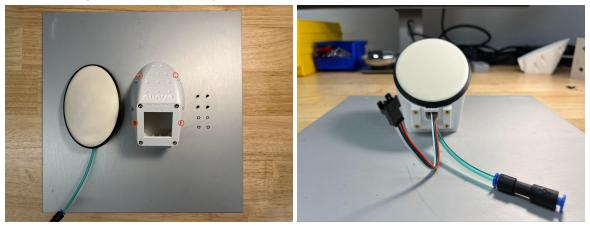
Locations and fasteners necessary to attach the Bubble Module to the Bubble Gripper Body
